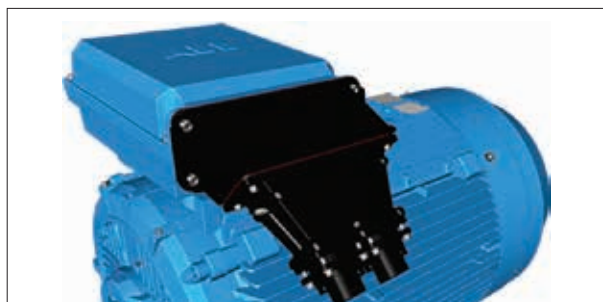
Terminal box for motor size 315 LK. Adapter and cable sealing end unit.
